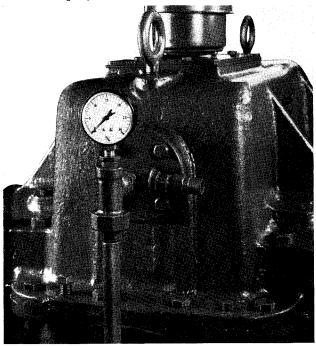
Arrangement of Spray Valve and Pressure Gauge
